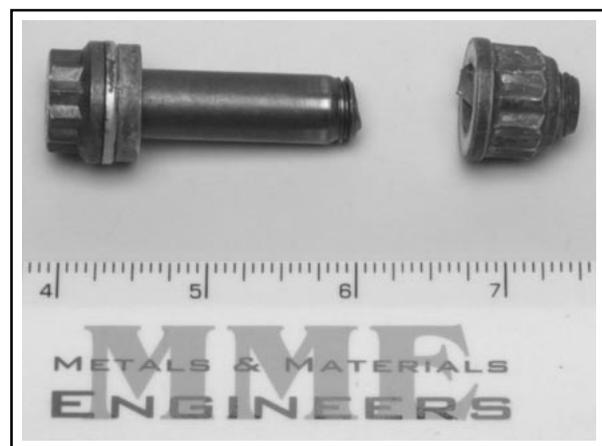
Photograph of an as-received failed titanium wing attachment bolt
